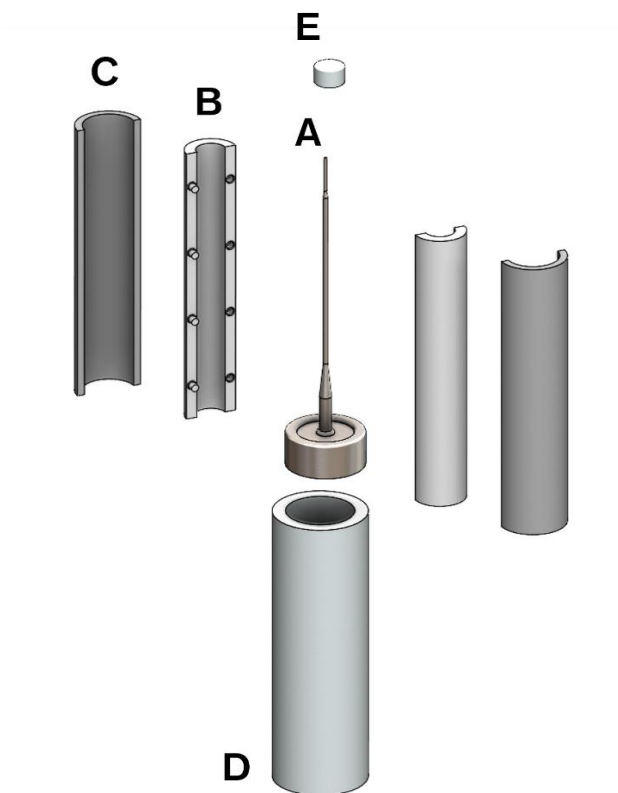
Casting tooling assembly with components labeled in the order of assembly (A) Stainless steel mandrel produced using DMLS. (B) Primary split casting block made with Watershed XC 11122 using SLA featuring location pips. (C) Secondary casting block made using ABS and SLA. (D) Support jacket made using Watershed XC 11122 and SLA used to stabilize the setup. (E) Watershed XC 11122 lid to seal the assembly and prevent contaminant entry.
